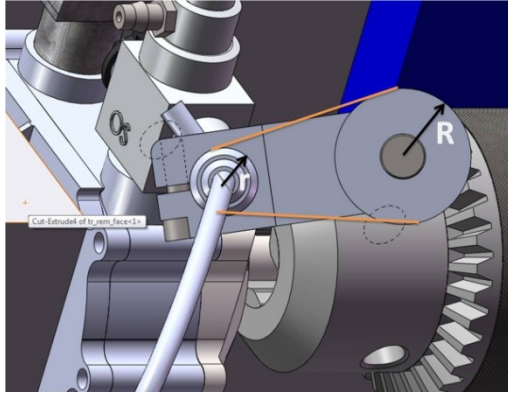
The key dimensions in this figure are r , which is the radius of the flexible torque shaft, R , which is the radius of the belt hub and L_c , the center to center distance between the two belt hubs.
